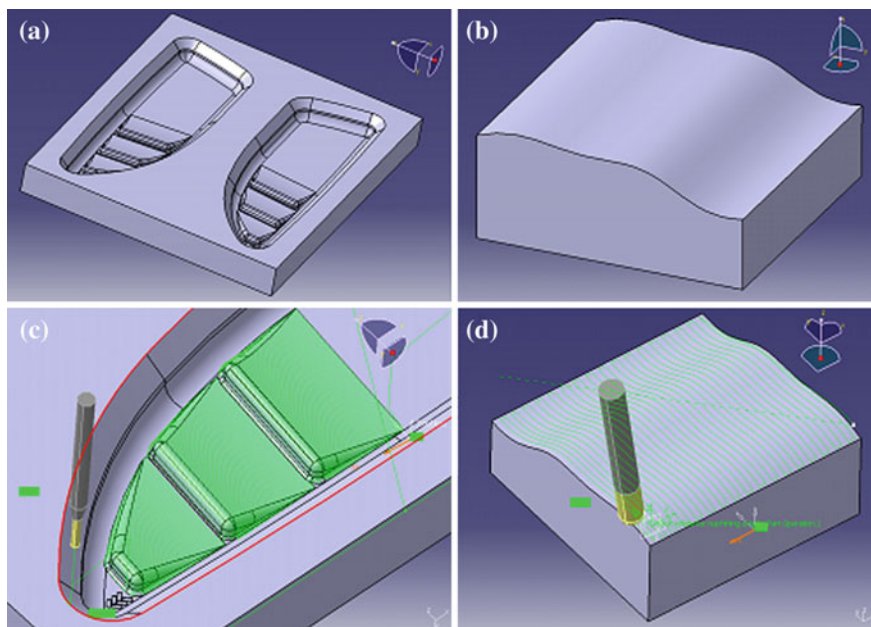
a Test part for 3-axis SSM; b test part for 5-axis SSM; c 3-axis surface machining tool path; d 5-axis surface machining tool path
